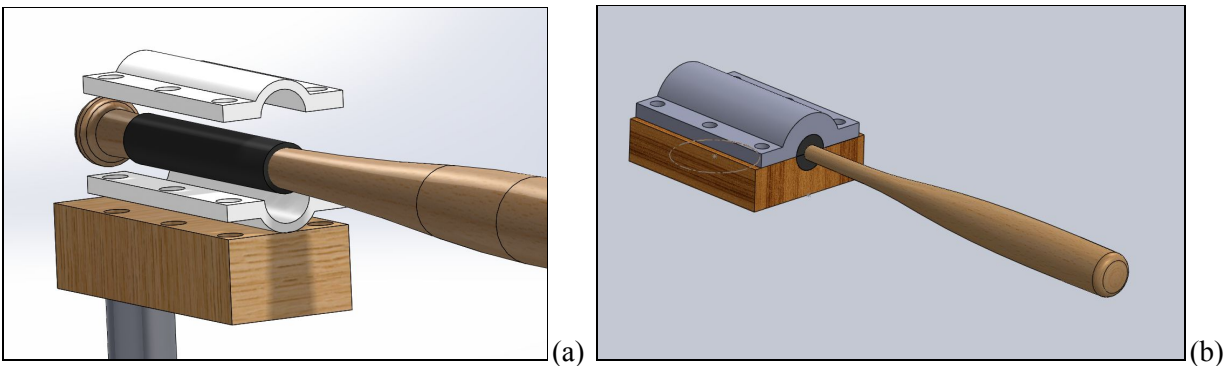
(a) First and (b) second clamp model CAD drawing to hold bat
